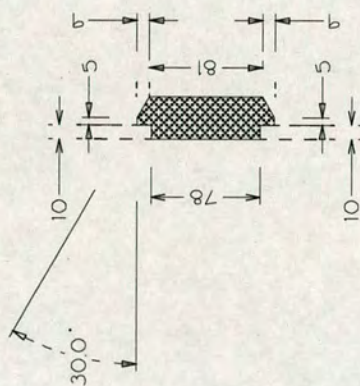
Design of the cone bearing of the misalignment apparatus.
